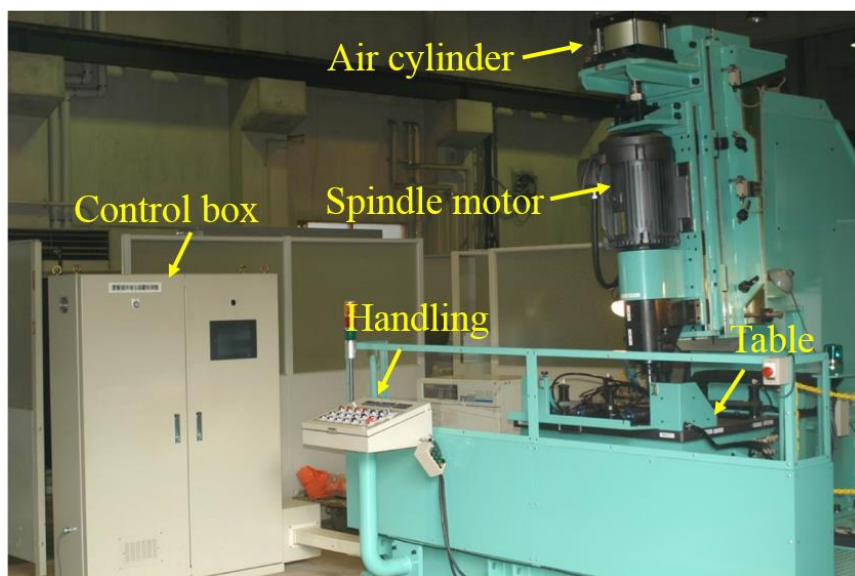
Overall appearance of FSW machine (JWRI-1).
